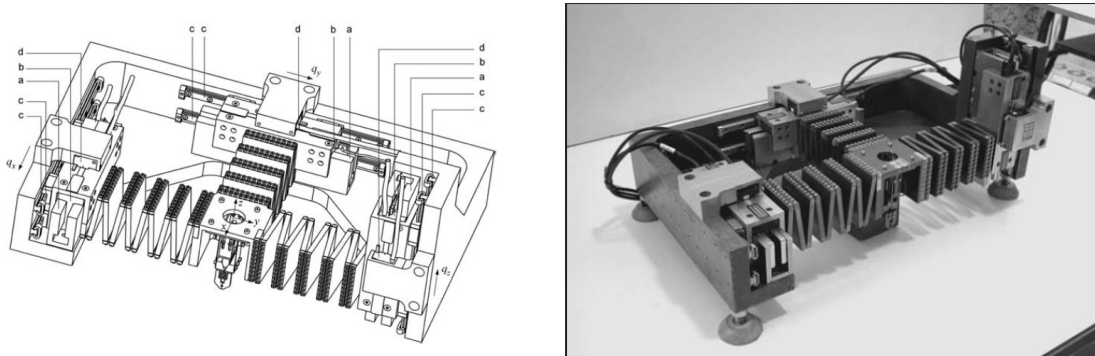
Three-translation MiniPaR robot design principle (left) and machined prototype (right) [17]
